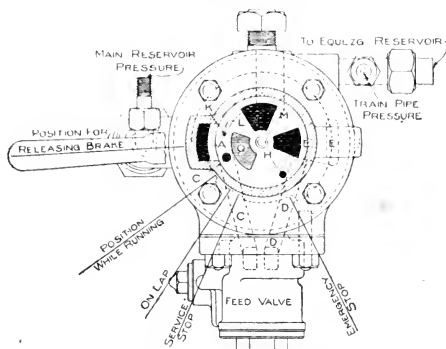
Section through Engineer's Brake-Valve.—Rotary Valve Removed, and Different Positions of Handle Shown.
